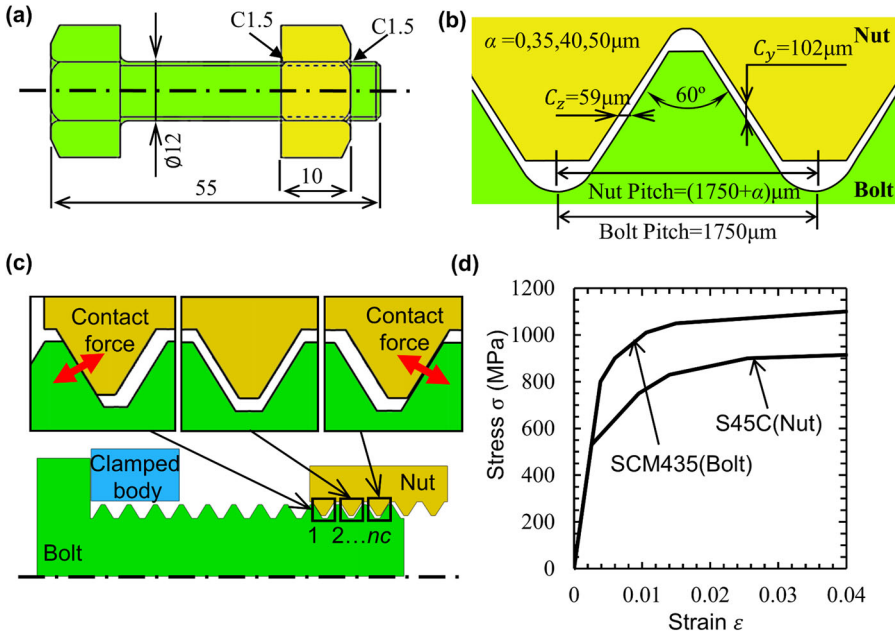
Dimension description (a) M12 Bolt-nut specimen [unit: mm]; (b) Pitch difference and clearance between bolt and nut threads [unit: μm]; (c) Pitch difference and clearance between bolt and nut threads [unit: μm].
